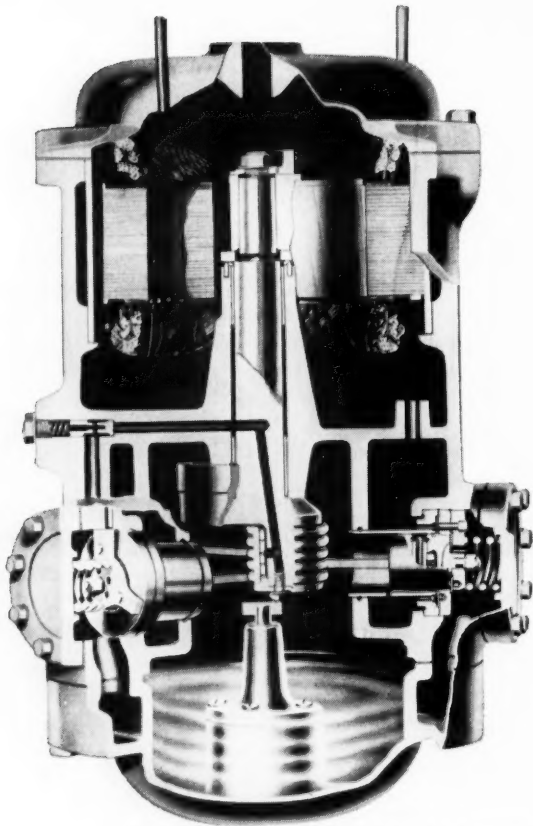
1/2 HP single cylinder hermetic unit for "Freon-12 or 22". Oil level is held at mid-point of cylinder and connecting rod. Centrifugal force in channels in the crankshaft delivers oil to bearings, wrist pin and cylinder walls.
